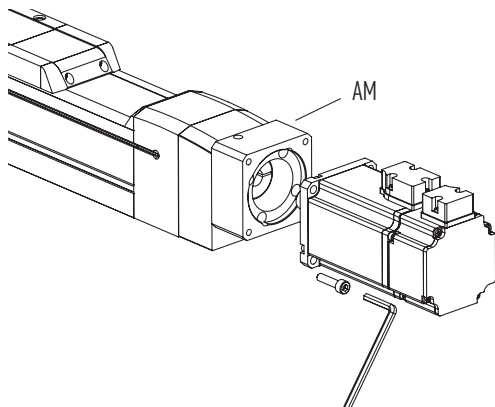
Bolting the motor to the linear axis HM-S
